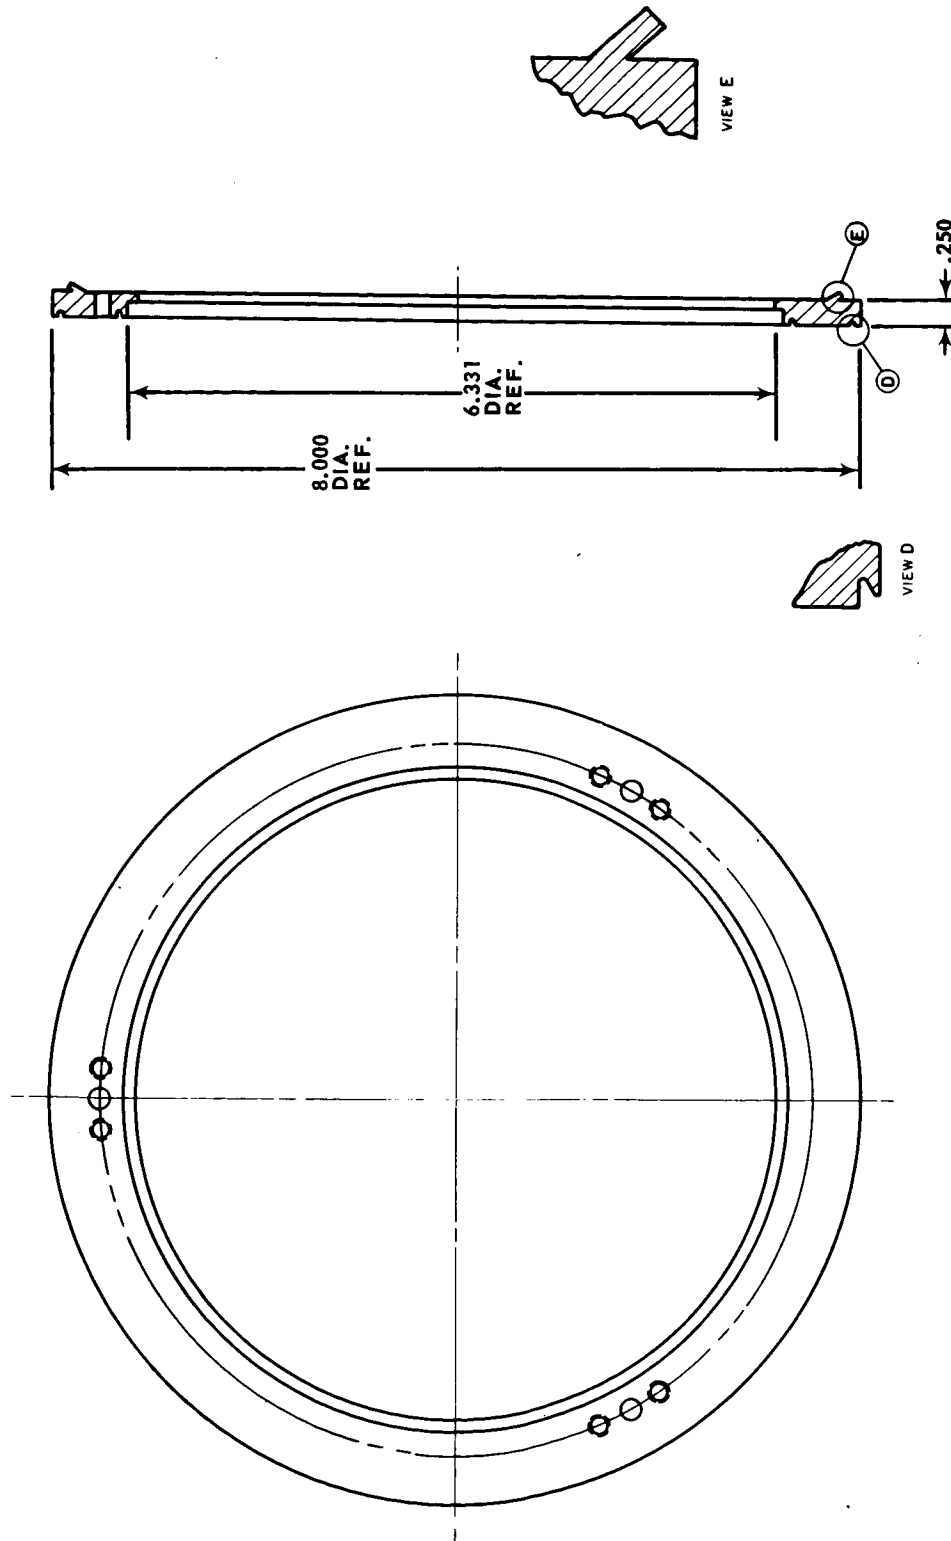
Bellows Rear Fitting For Face Contact Bellows Secondary Seal
